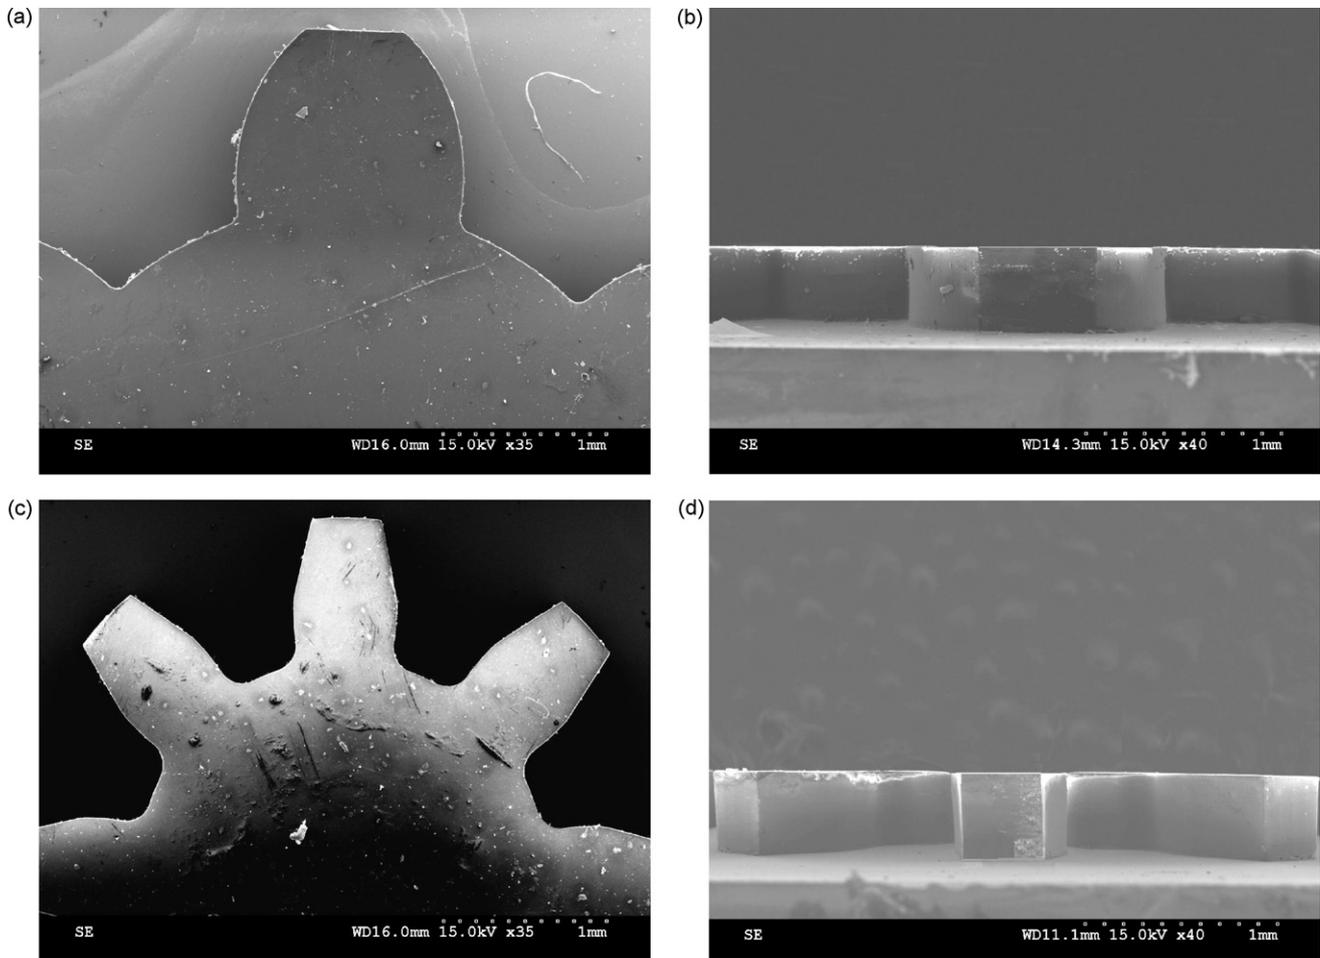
SEM photographs of the SU8 gear mold: (a) the 6 mm SU8 gear structure (top view), (b) the 6 mm SU8 gear structure (side view), (c) the 4 mm SU8 gear structure (top view), and (d) the 4 mm SU8 gear structure (side view).
